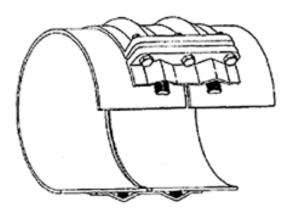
, D-2 – Typical Split Sleeve Coupling
